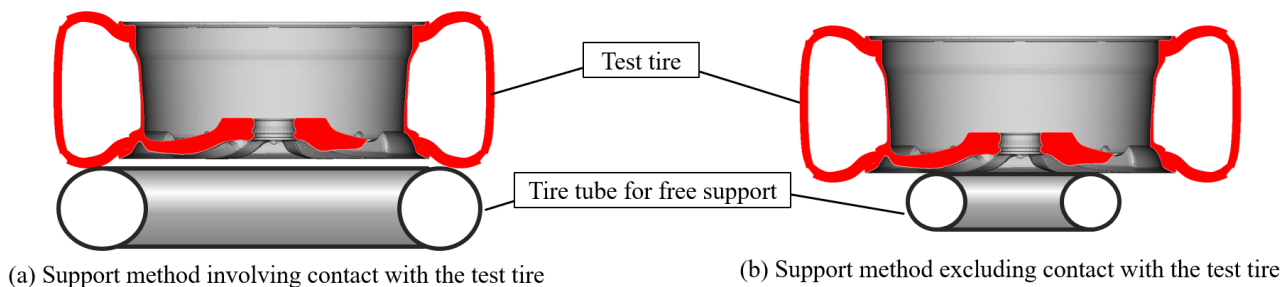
Support methods for a tire-wheel assembly using a tire tube
